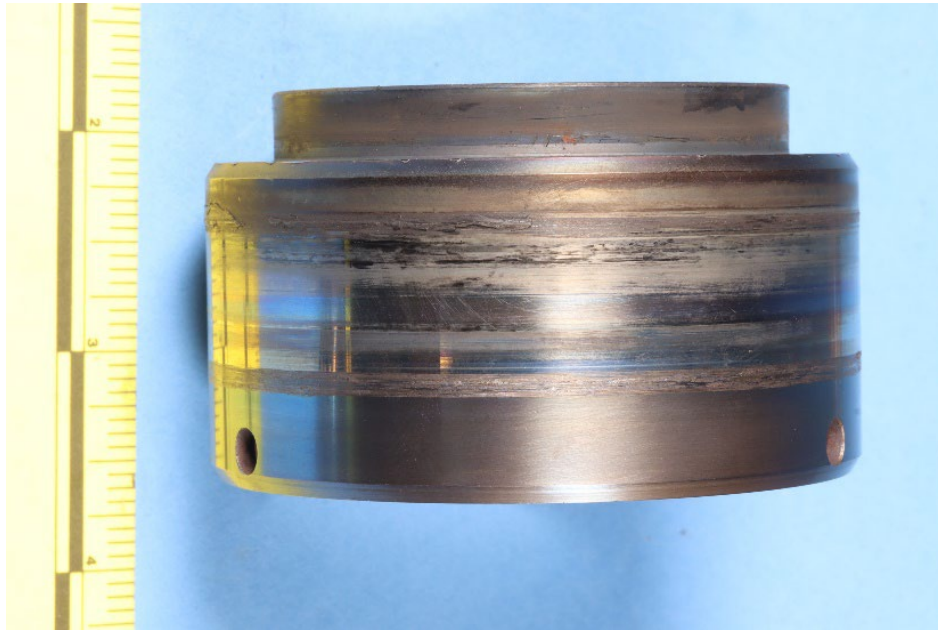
Forward oil impeller (metric side of ruler shown).
